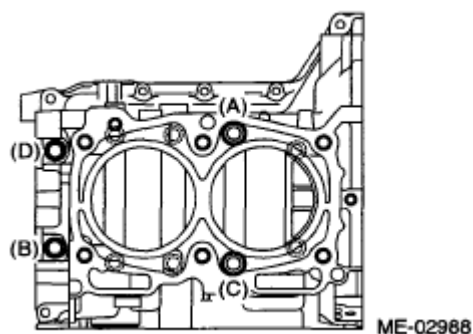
Tightening Sequence Of Cylinder Block Connecting Bolts - LH Side
